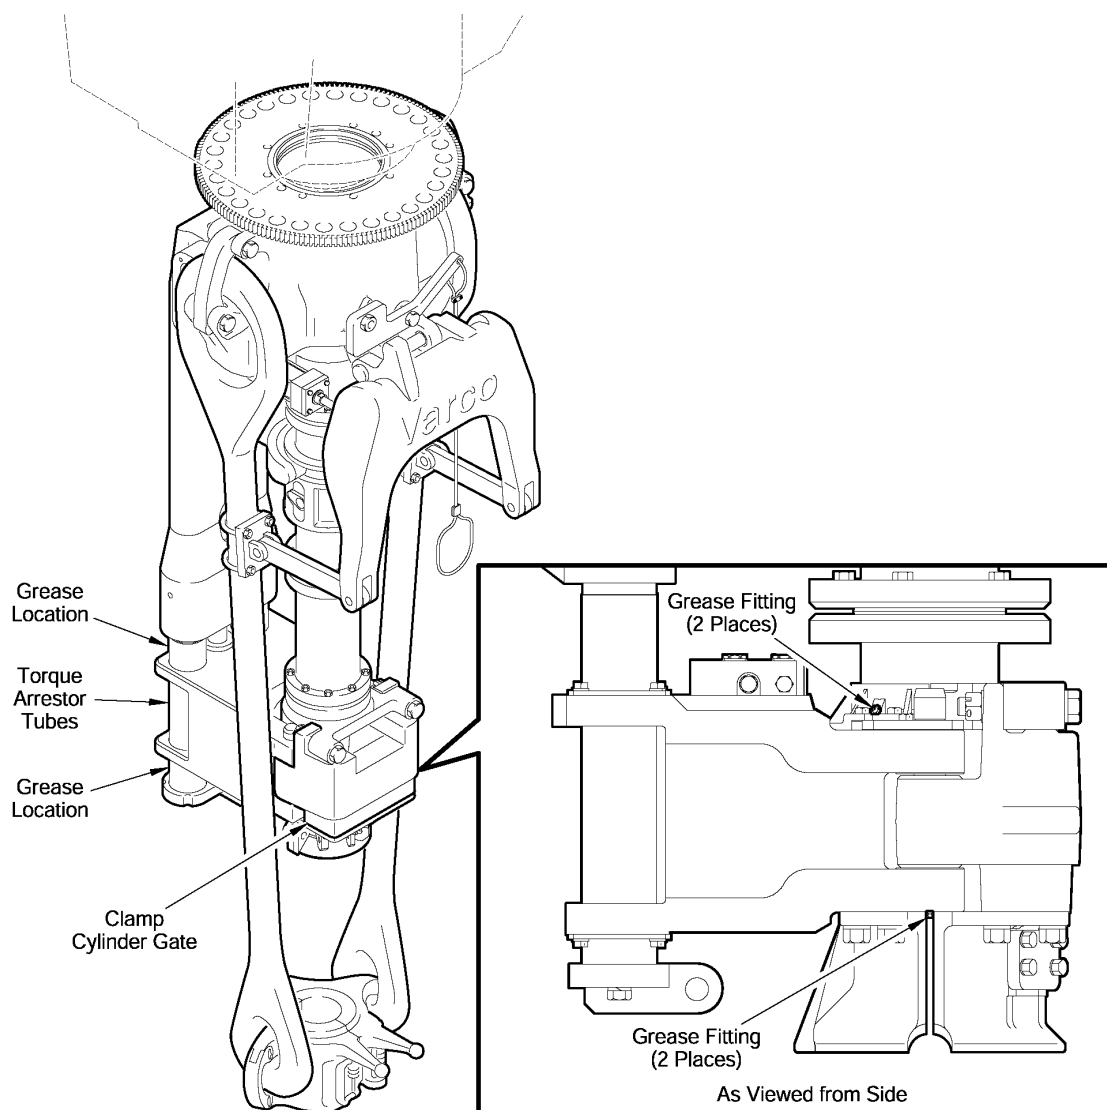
Lubricating the torque arrestor and clamp cylinder gate
